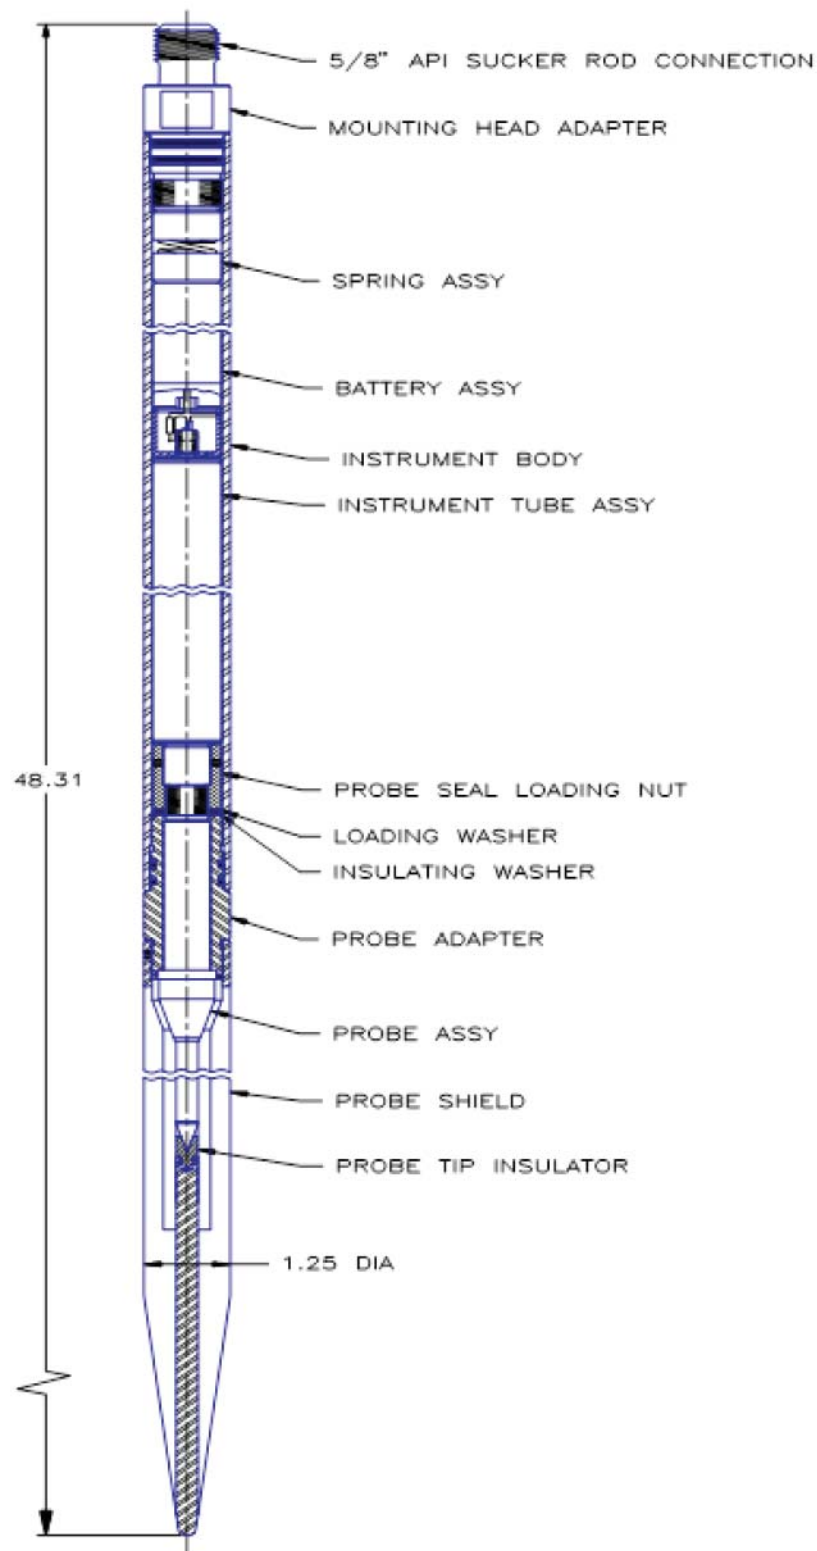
Cross-Sectional View of Fully Assembled DHT
